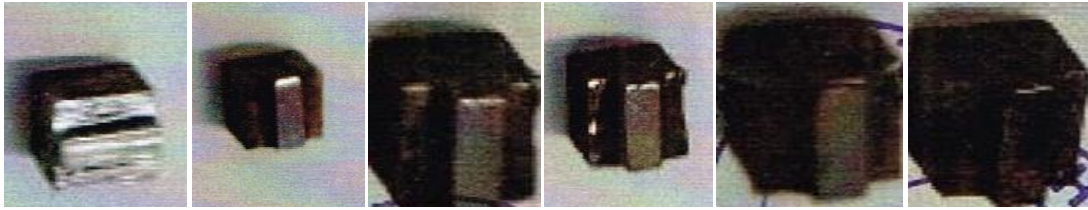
Corrosion of weld bead of sample L form 0 hour to 120 hours
